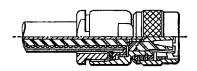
B-Assembly instructions-C Type plugs and sockets-Captive contact
